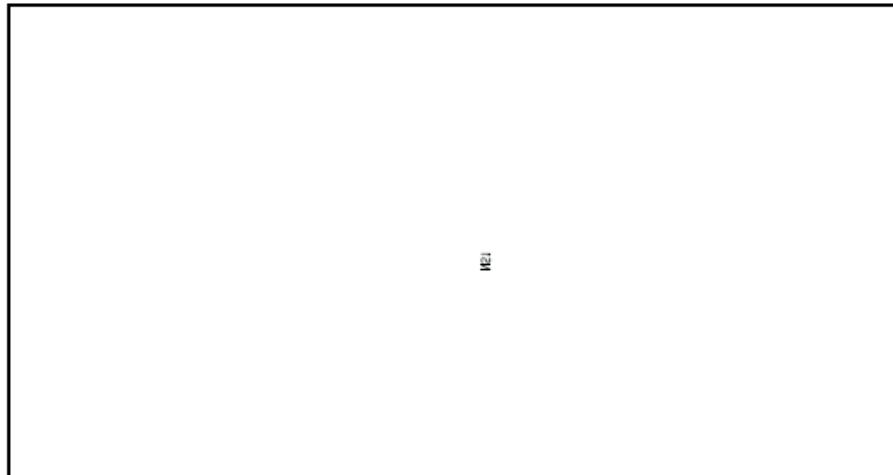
UCD3138CC64EVM-030 Bottom Assembly Drawing (no components on this side)
